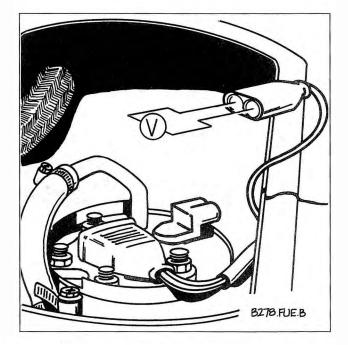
Schematic view of voltage supply to transfer pump being checked at harness connector.
